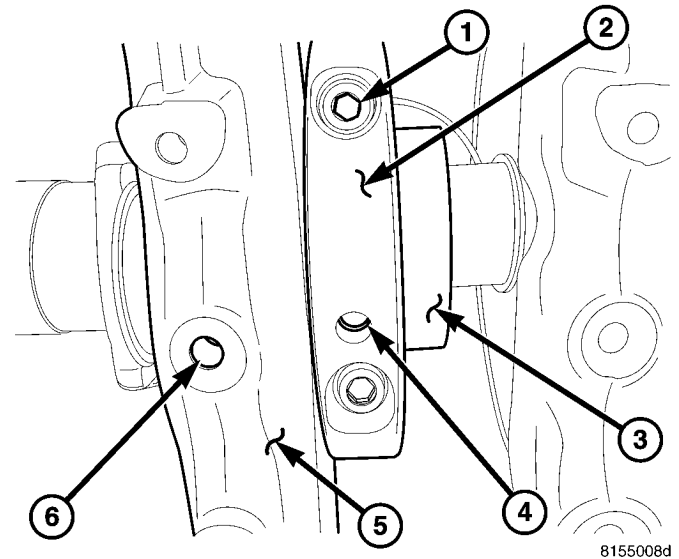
CRANKSHAFT SUPPORT OIL PASSAGE ALIGNMENT
